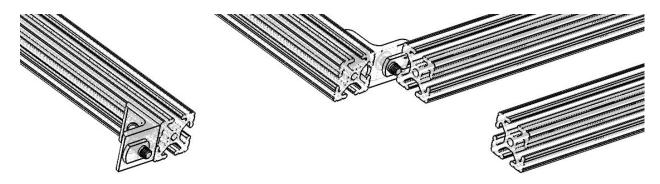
2ft beam (#QDXE) with corner brackets sliding in one 4ft beam (#HJXQ).
